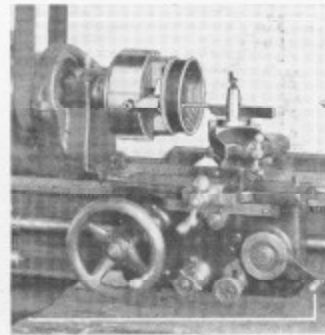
Chasing the Threads of a Hub Cap held in a 4-Jaw Independent Chuck on the Lathe
